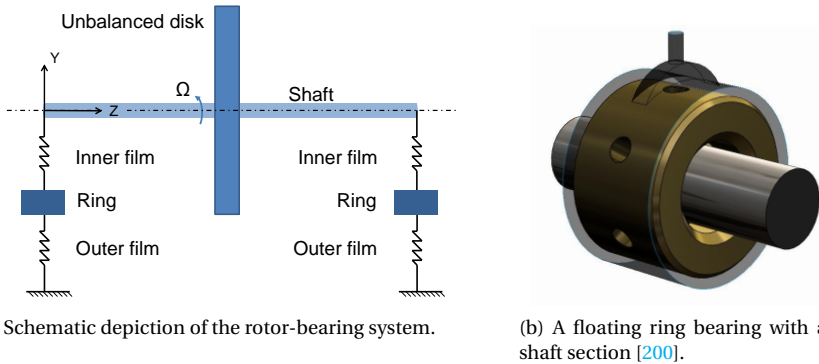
Laval rotor on floating ring bearings. Dimensions and material properties can be found in Section 4.3.
